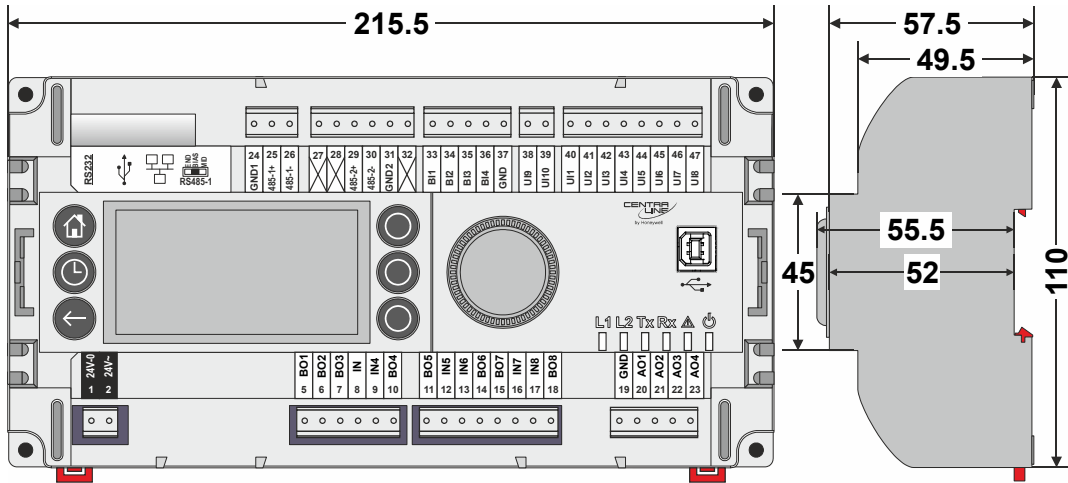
EAGLE Controller with built-in HMI, dimensions (in mm)
